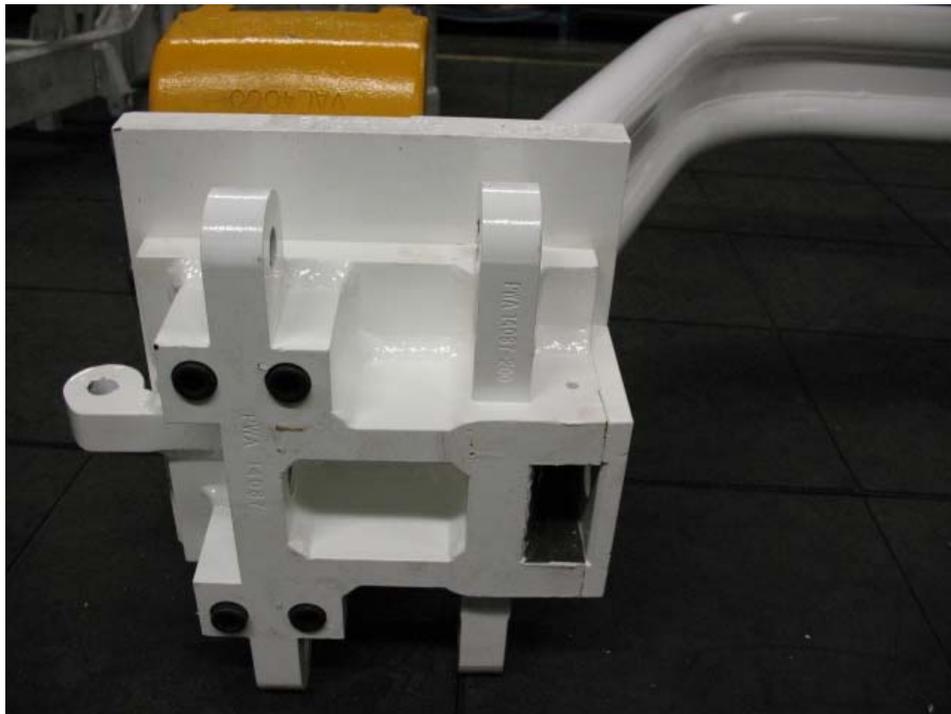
J52 Aft Engine Yoke (SN: P9H513) Support Prior to Coastal Exposure
